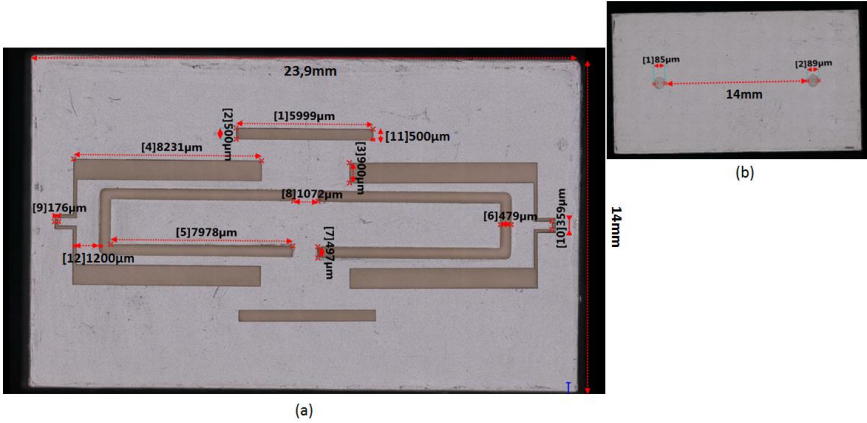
Dimensions of the fourth second order filter(24mm×14mm), (a) front side, (b) back side.
